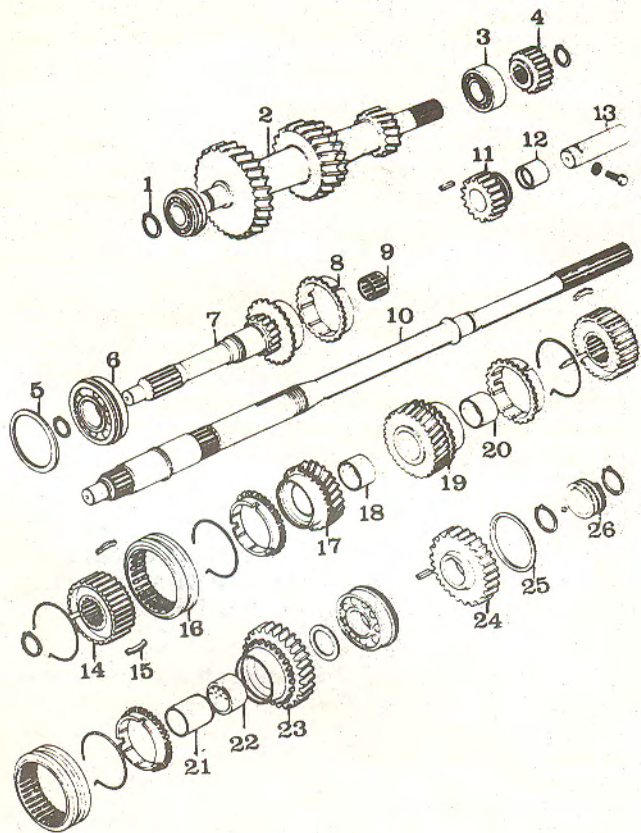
Exploded view of the gearwheels and shafts fitted to the four-speed gearbox.
